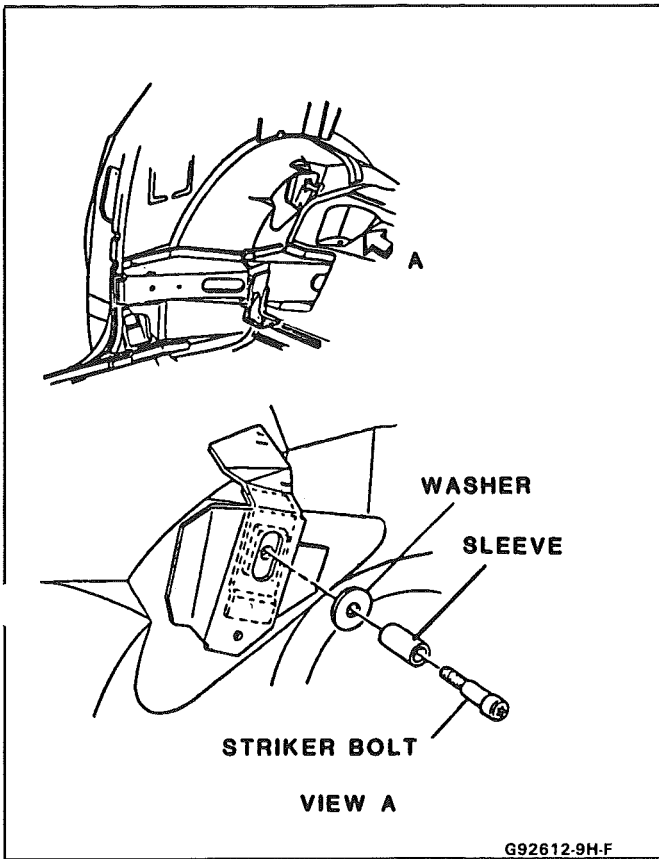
Rear Seatback Lock Striker Bolt Installation
